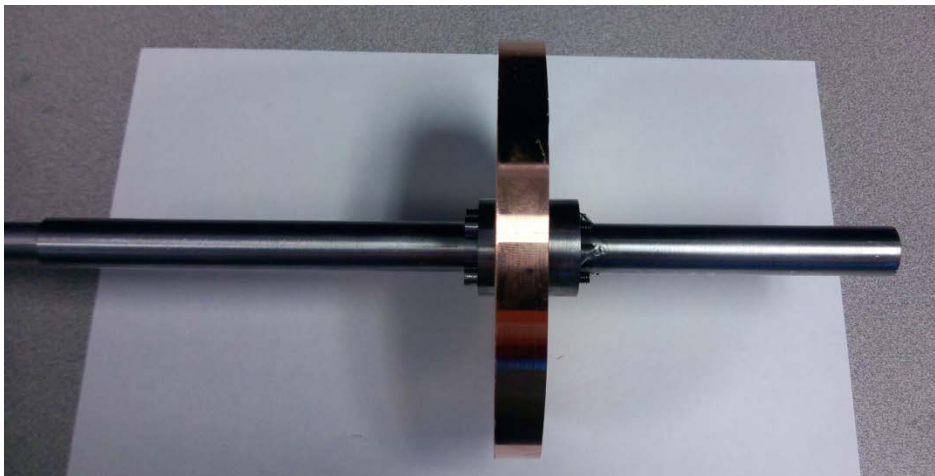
Image of the assembled shaft (the rotor has not been completely machined yet)
